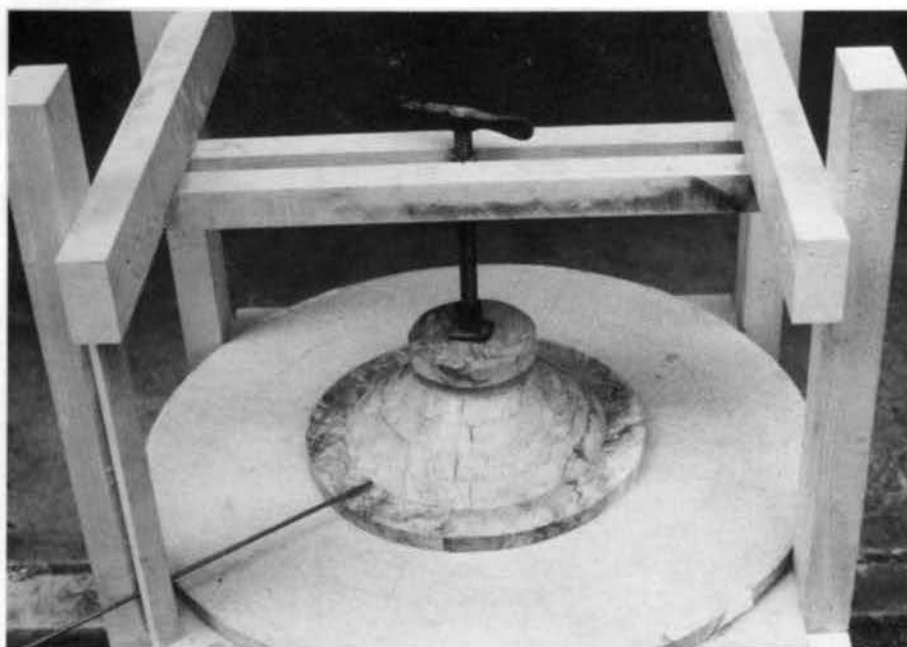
Glued and clamped in a shopmade clamping jig. The table rotates and the metal bar helps maintain the center.
